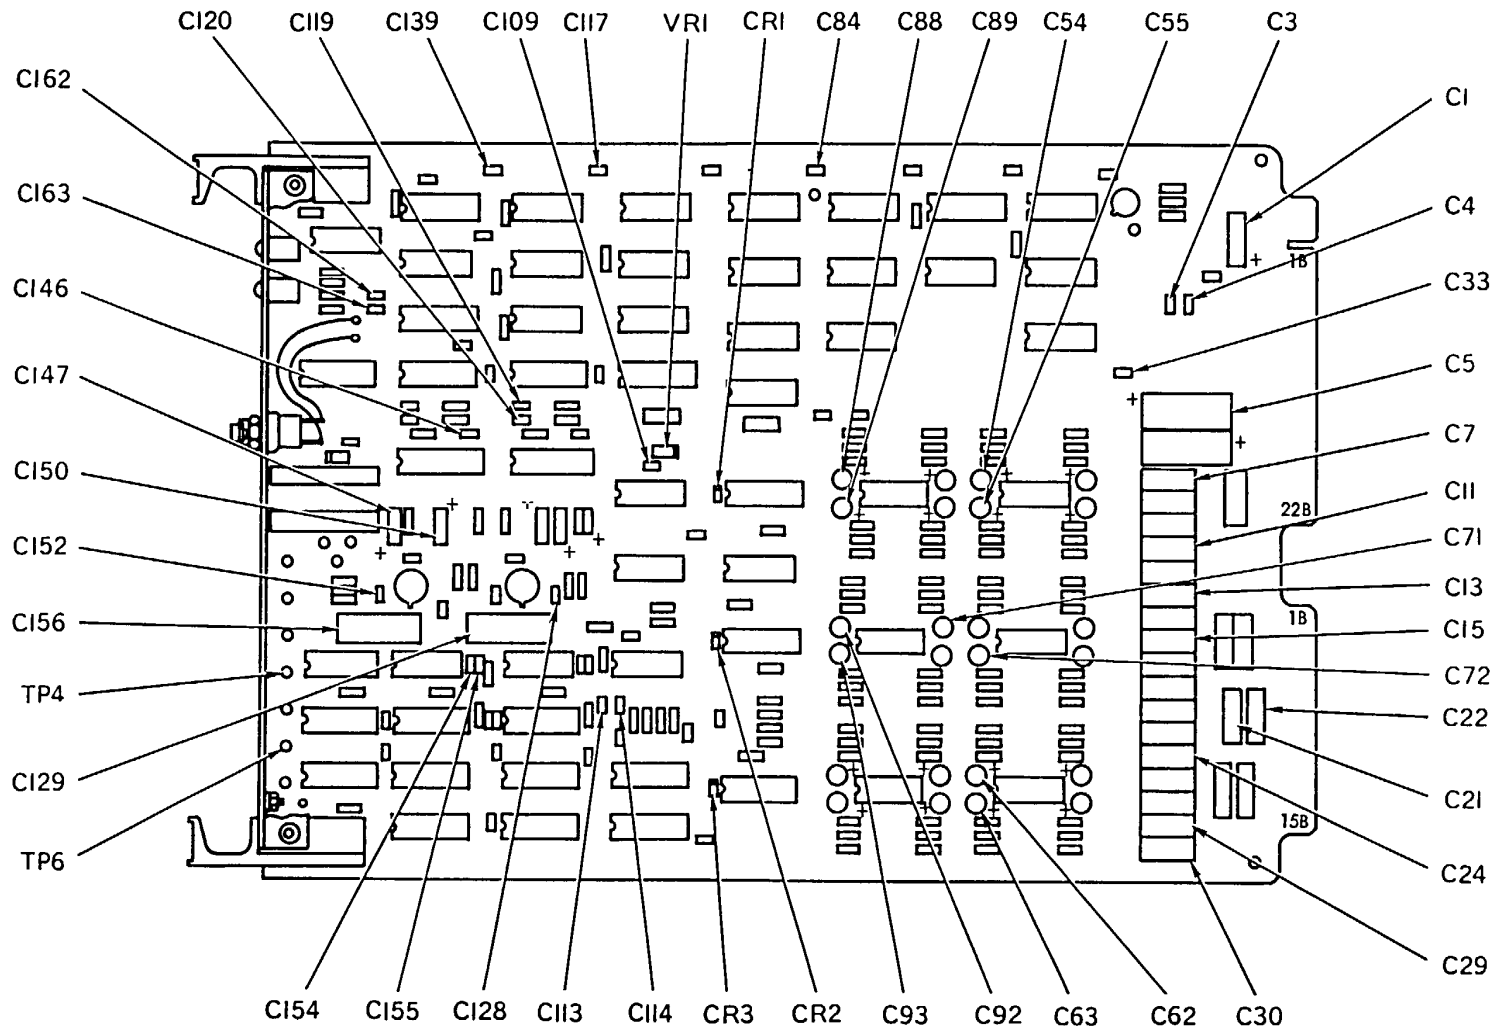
PCM unit parts location diagram (sheet 3 of 14) PCM02 and PCM04.
